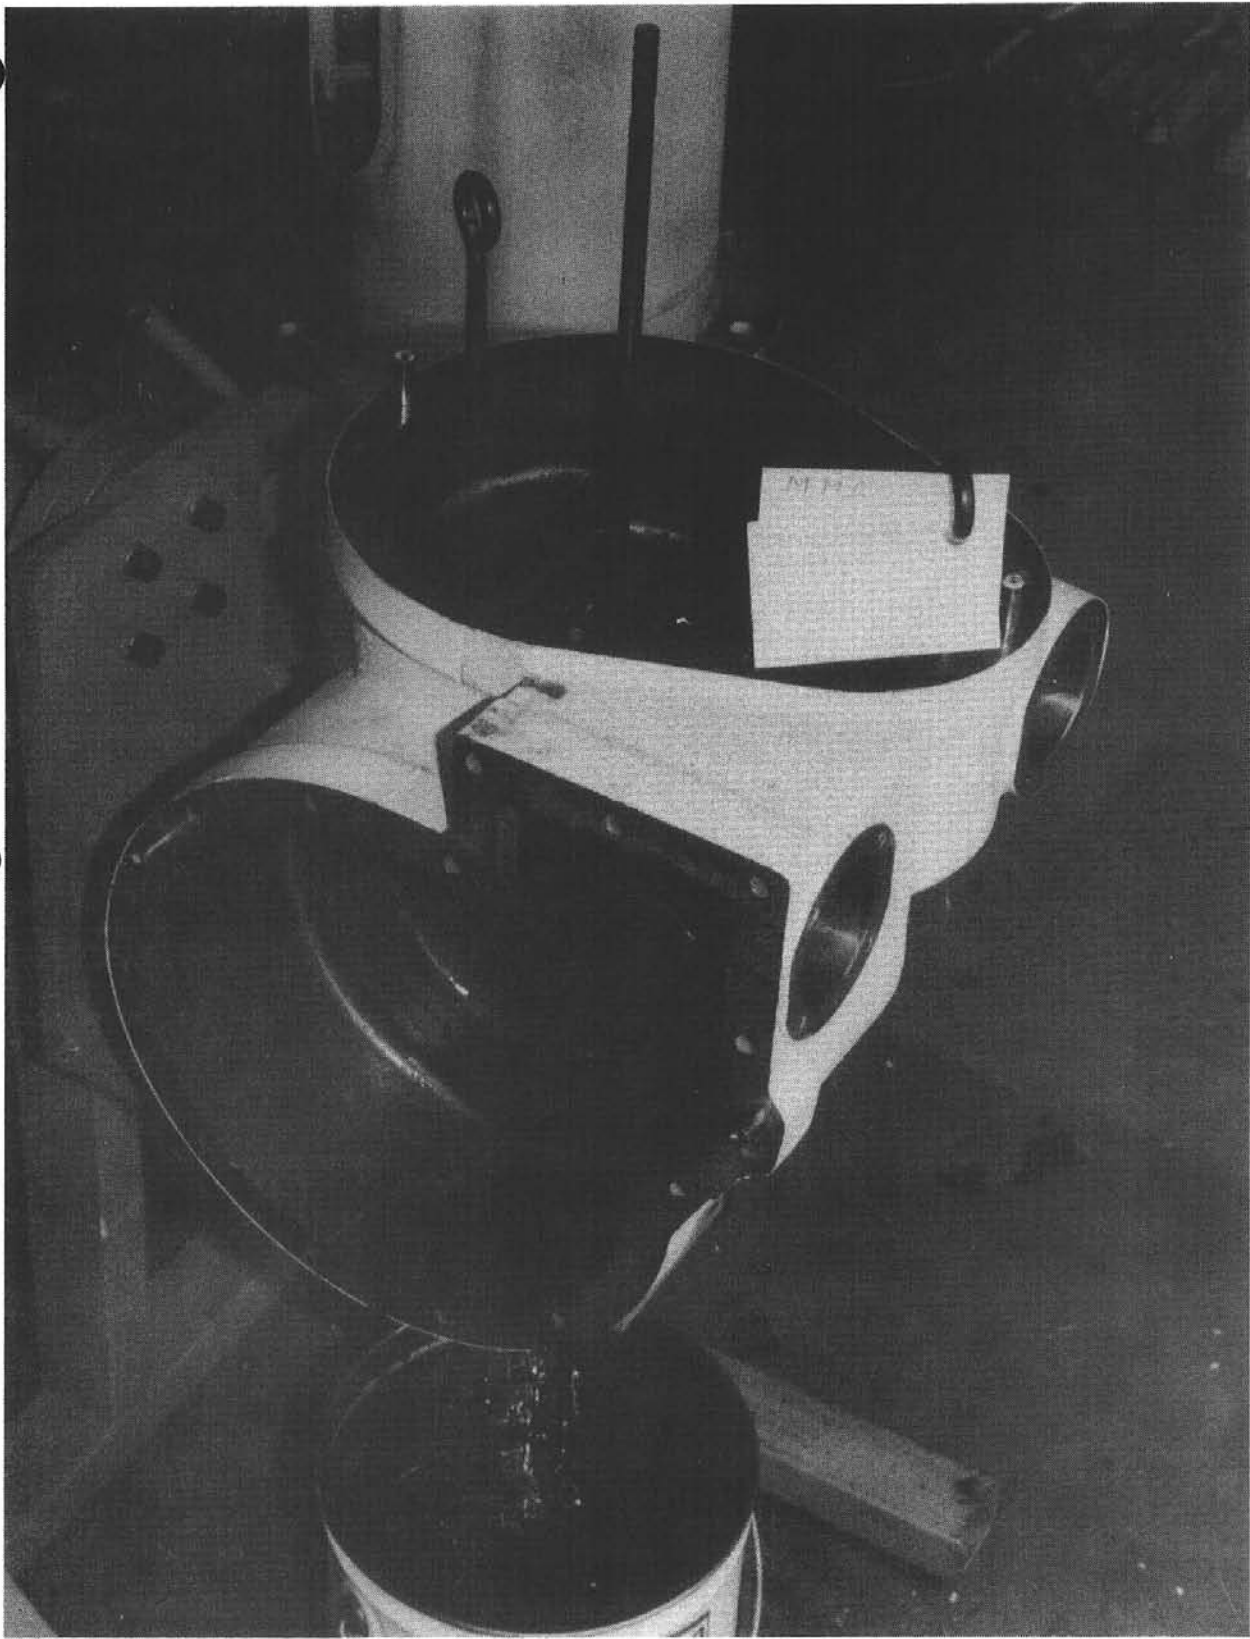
MMC Azimuth and Elevation Housing after Test
